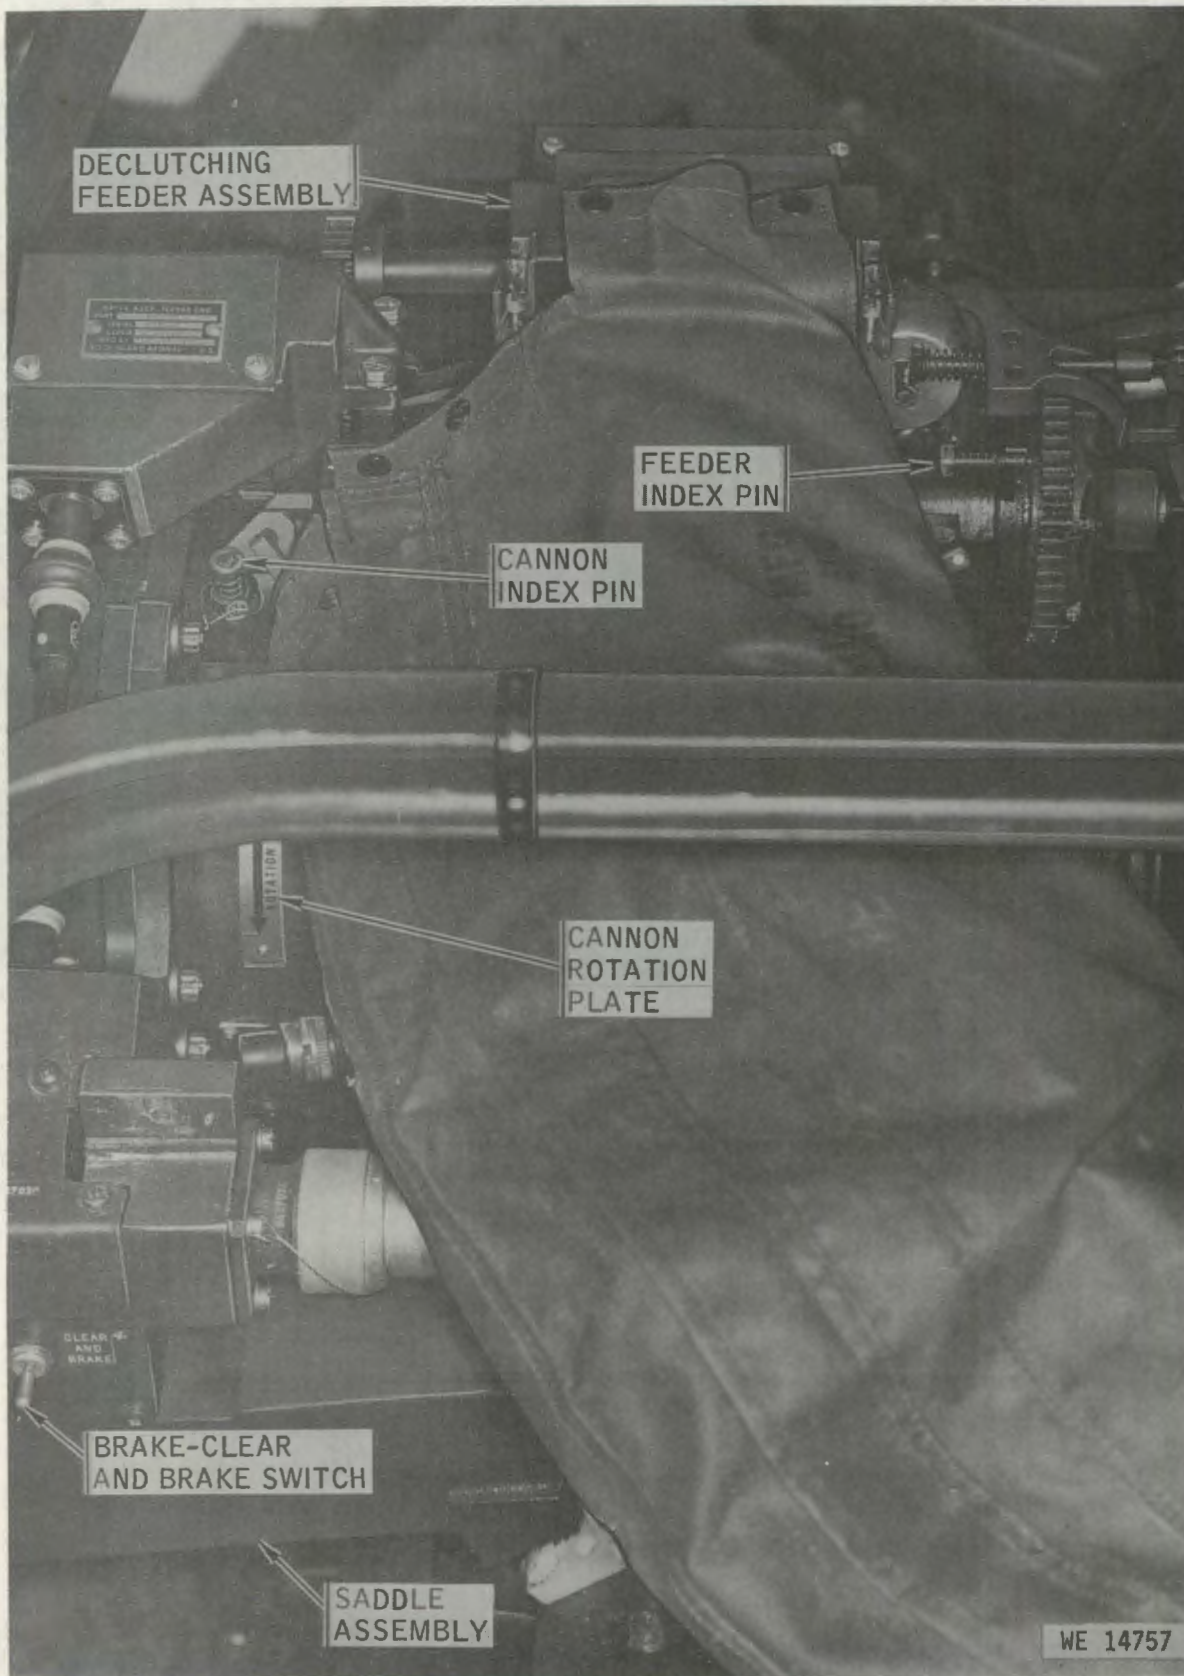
XM168 cannon and XM157 mount, front view, parts location.
